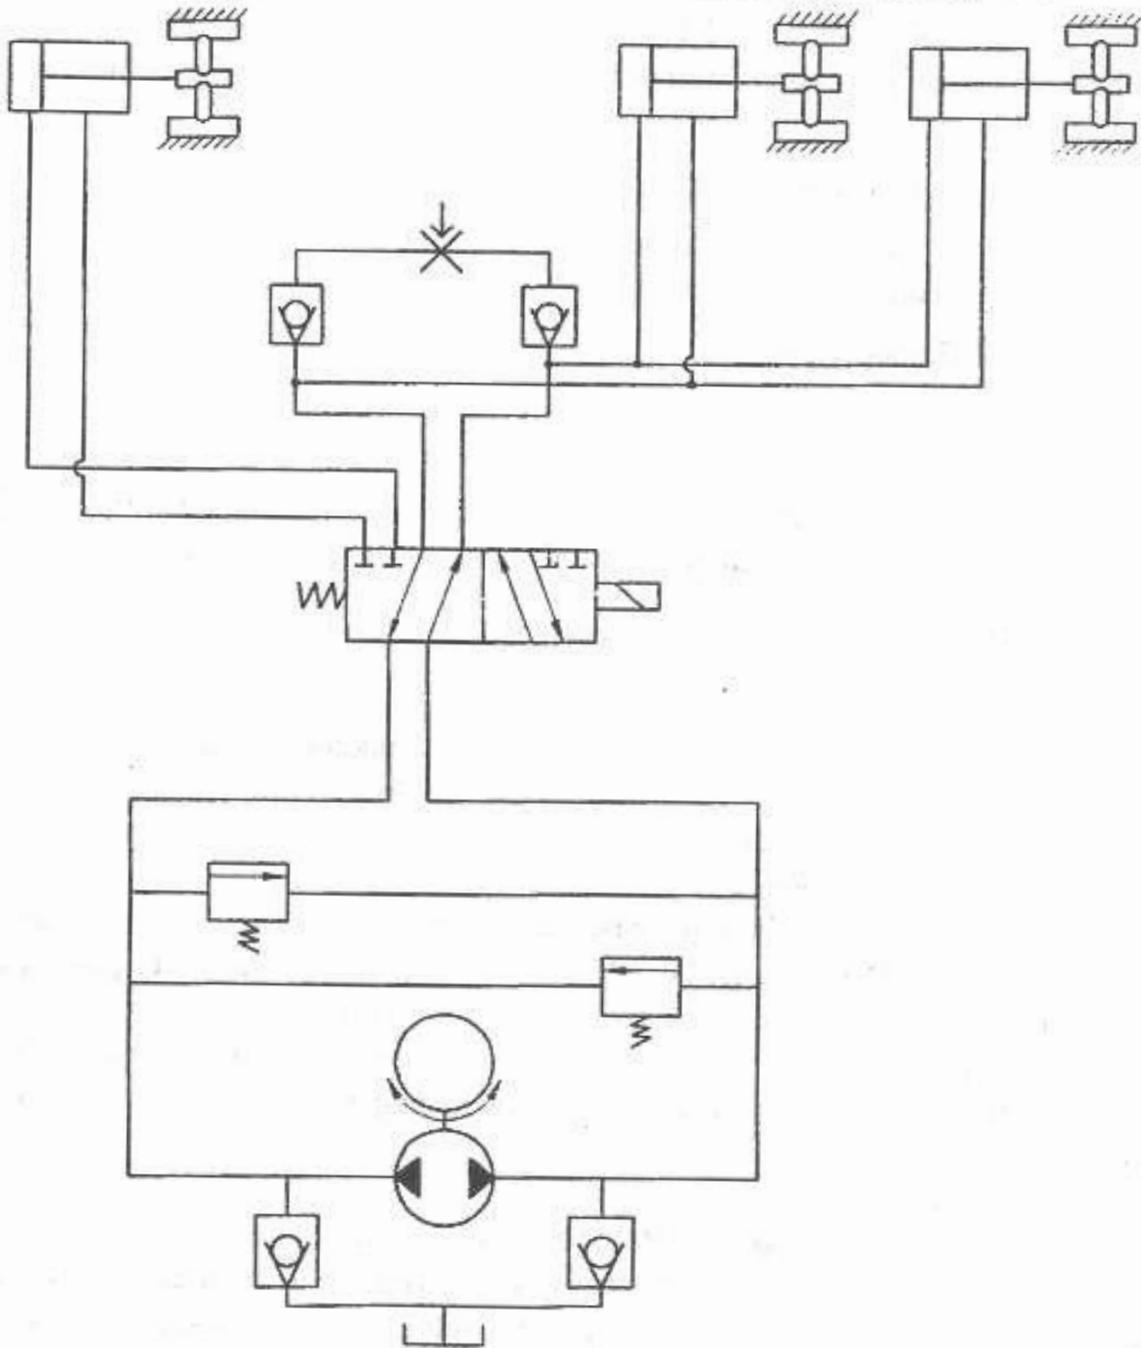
clamp hydraulic mechanism and oil circuit illustration
